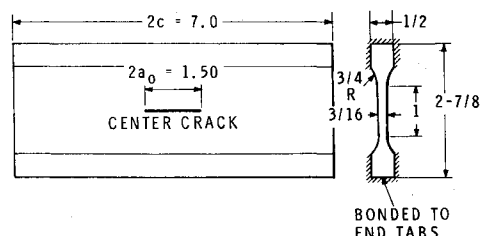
Strip-biaxial sample. (All dimensions are in inches.)
